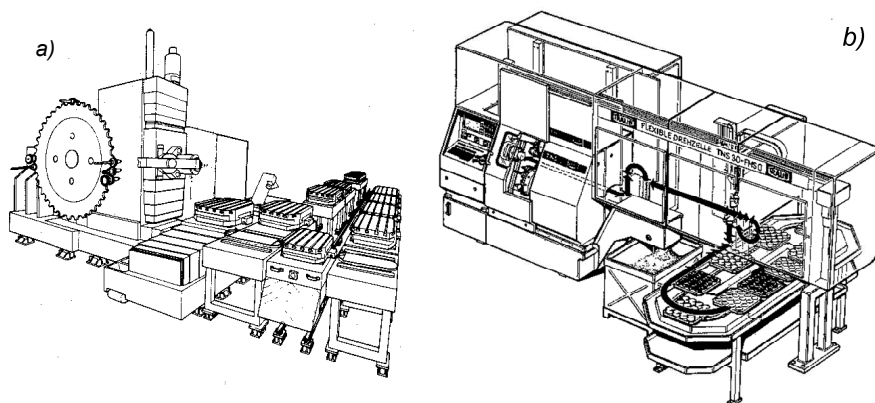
Flexible manufacturing cells: a) milling, b) turning
